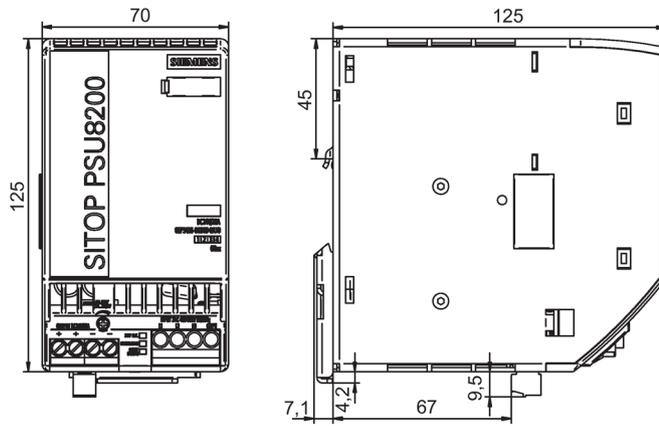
Dimension drawing 6EP3436-8SB00-0AY0
